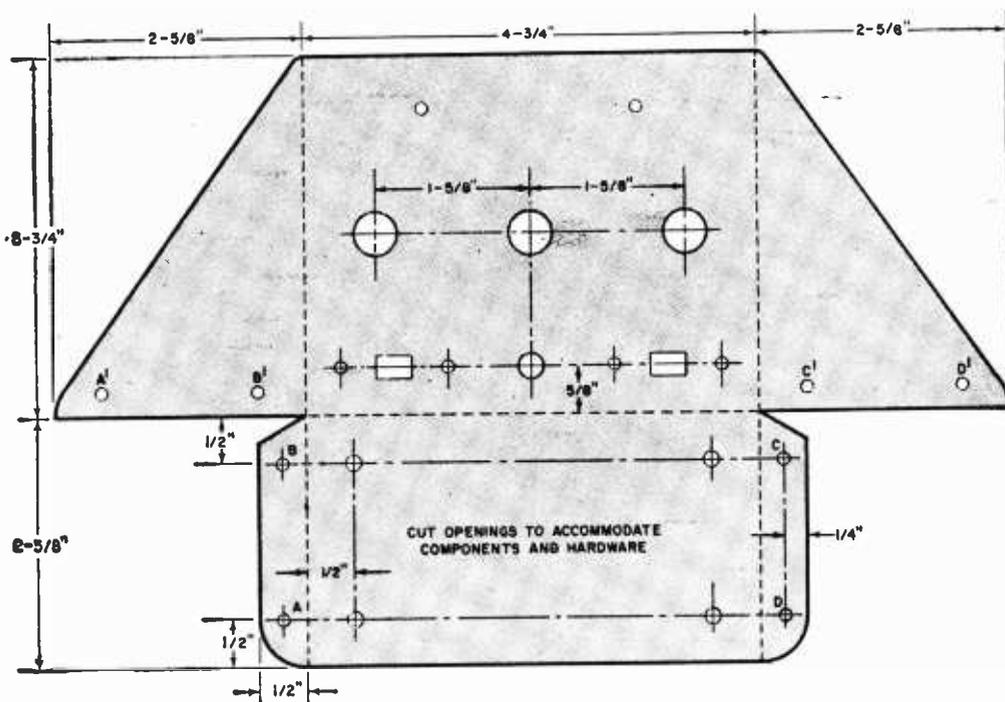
Chassis can be formed from a thin piece of sheet aluminum. Drill and shape to size as shown.
